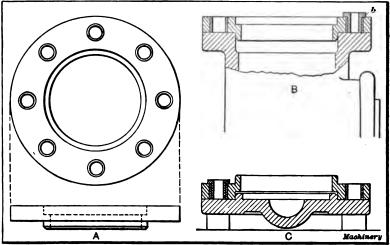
Jig for Cylinder Flange and Head, and its Application
